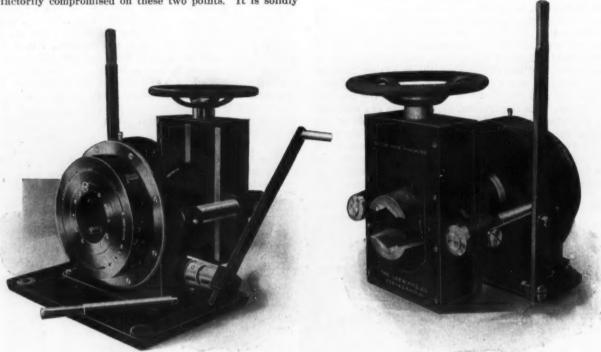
The Die Side of the No. 1 Loew Victor Pipe Machine.
